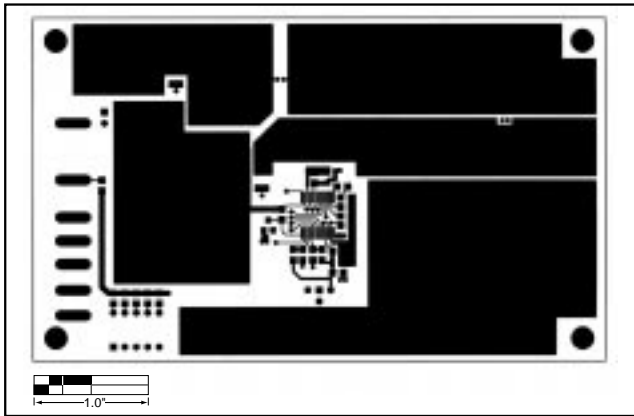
MAX1624 EV Kit PC Board Layout—Component Side
